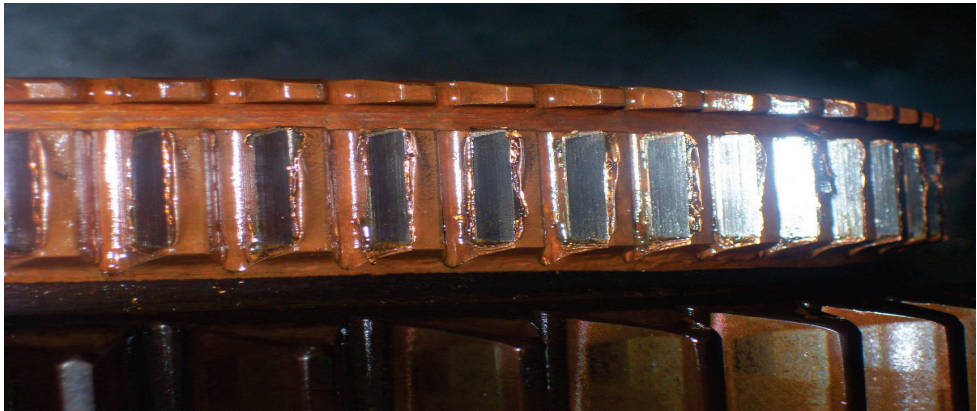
Excessive wear of a gear wheel with an eccentricity defect
